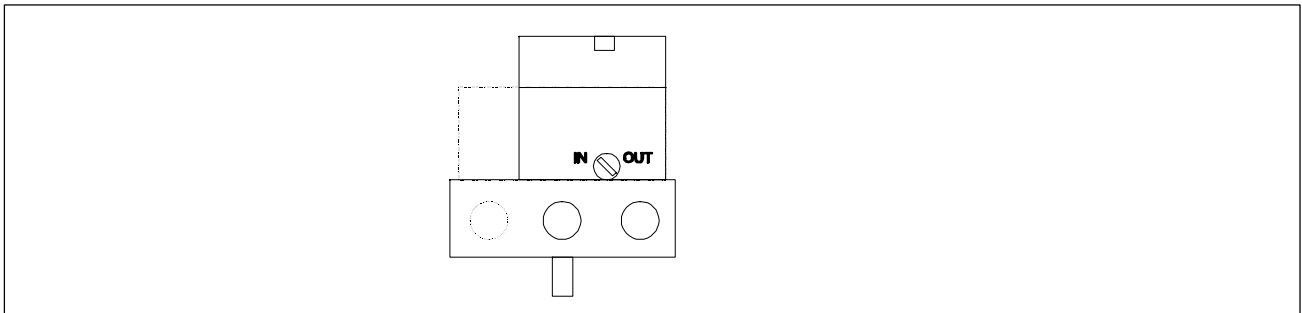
Purging air changeover switch above the pneumatic terminal block, view of the device on the pneumatic connection side with the cover open
